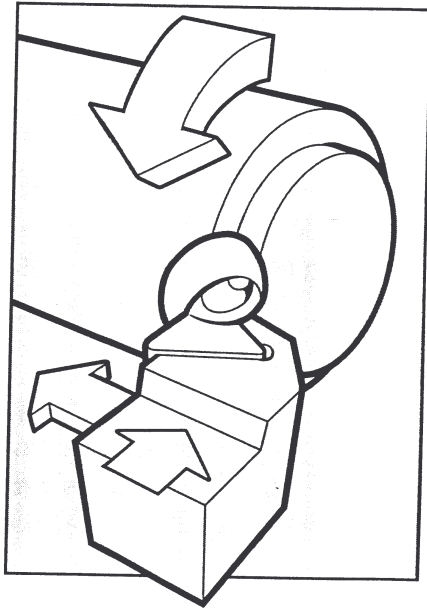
Cutting tool insert for turning processes [AB Sandvik, 1994]
